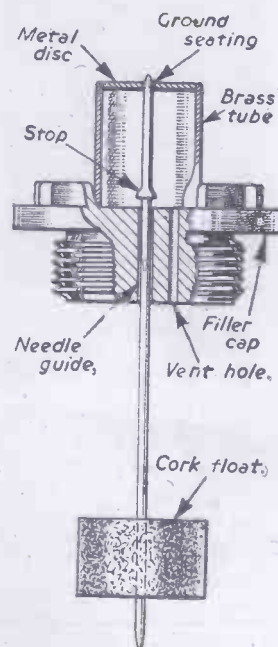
Details of the automatic air valve and filler-cap of drum.
